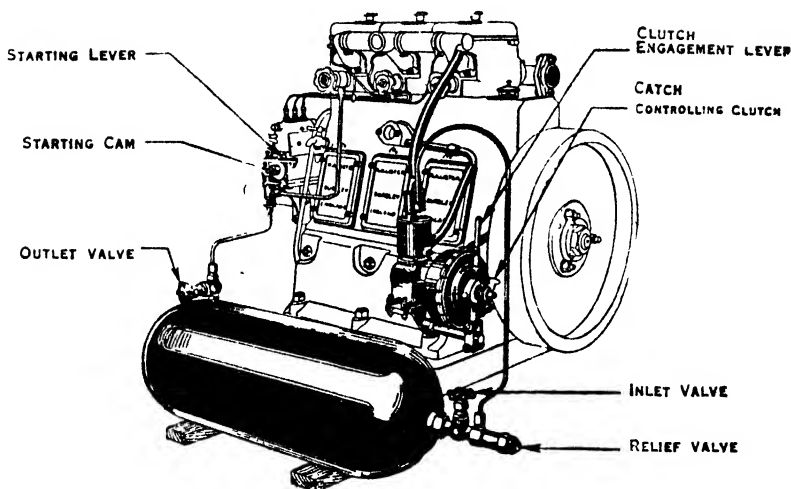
ENGINE FITTED FOR COMPRESSED-AIR STARTING—SEPARATE AIR-COMPRESSOR TYPE (R. A. Lister & Co., Ltd.)
